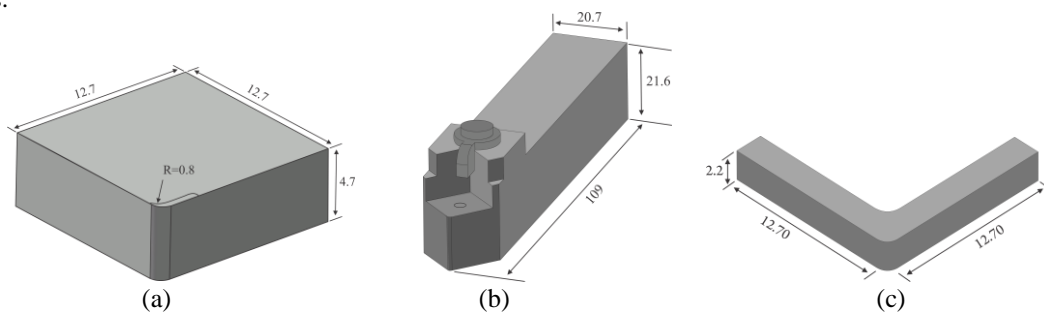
Main dimensions (mm): (a) cemented carbide cutting tool, (b) tool holder, and (c) shim.
